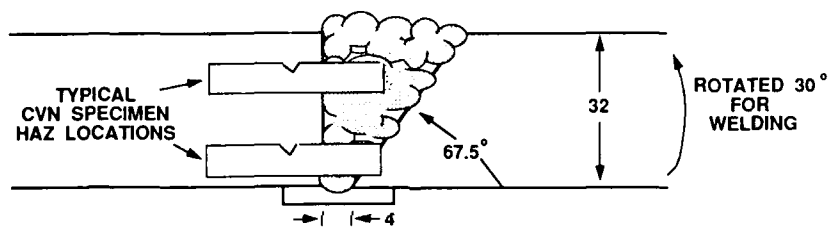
Weldment configuration and specimen location for the heat affected zone study.
